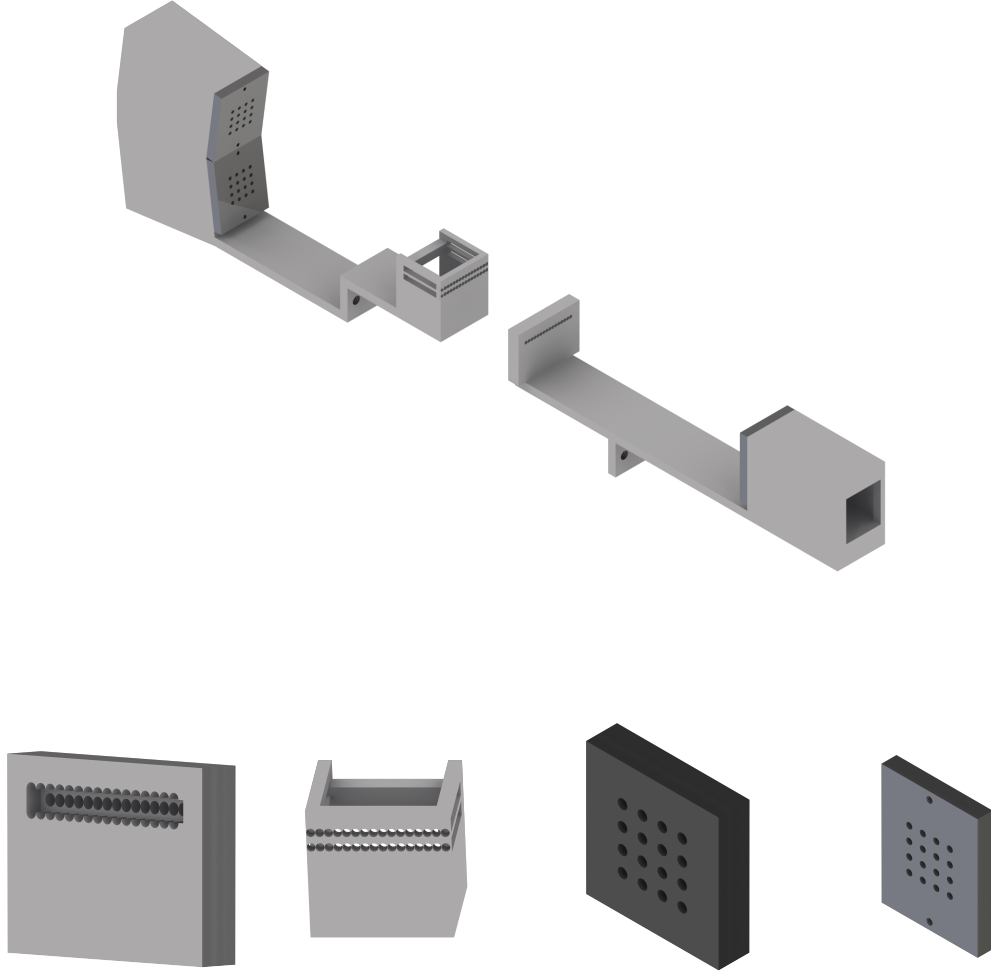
Set-up of the first prototype. All pictures were taken with the graphical design program Inventor [34], which was also used to design these components. On the top is shown the mechanical holding structure of one module. The fibres in the middle and the PMTs in their housings are not shown. Depicted below are close-ups of different components. Going from left to right are the harness for the fibres on the side with one PMT, the fibre-harness on the other side, the PVC block in which the fibres are glued to press them on the PMT and lastly the cap that closes the PMT housing. These depictions of the components are not to scale.
